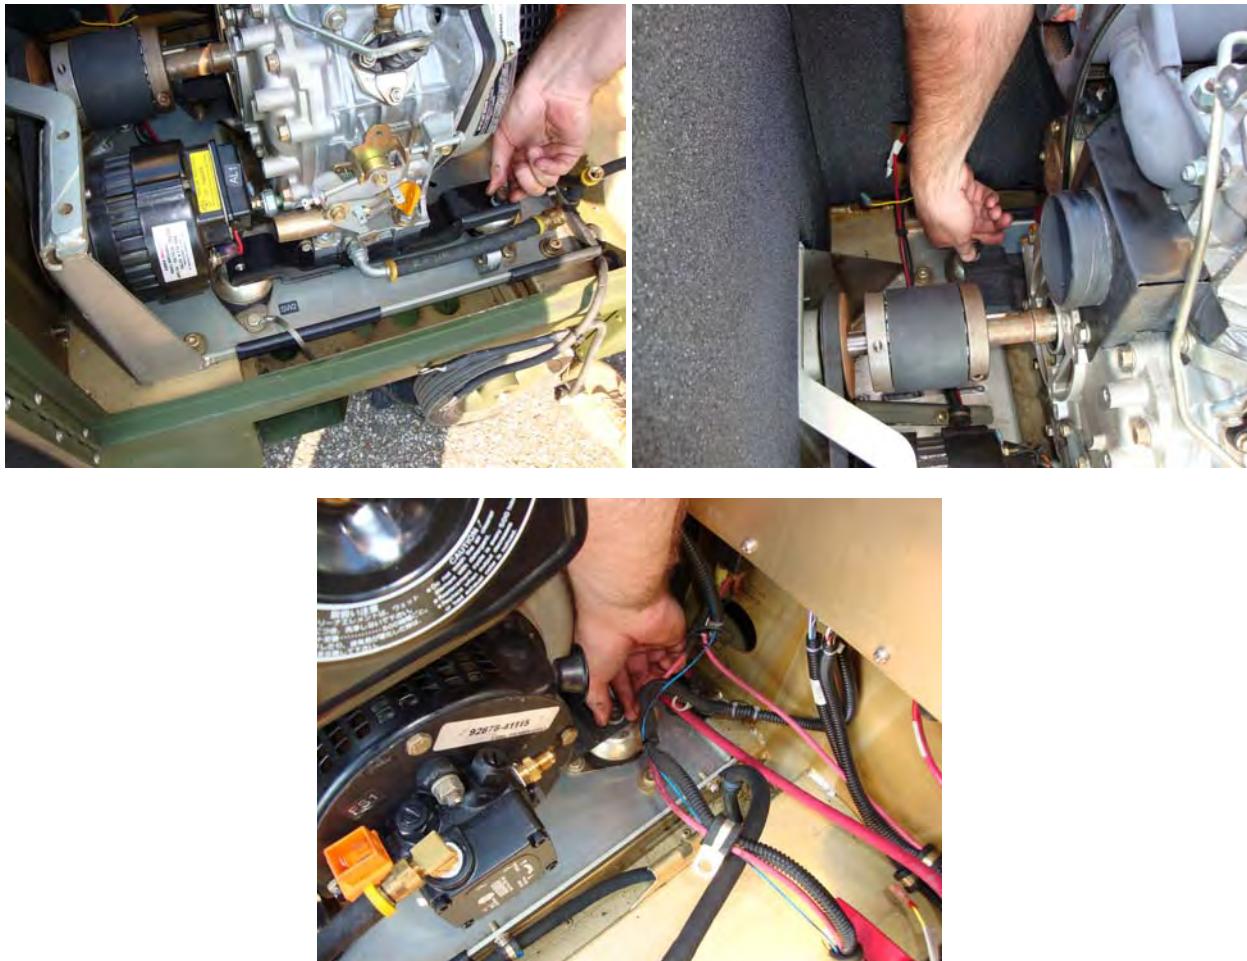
Securing Mounting Brackets to Vibration Mounts.
